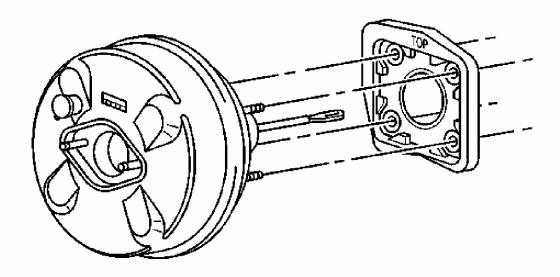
View of Vacuum Brake Booster Courtesy of GENERAL MOTORS CORP.
